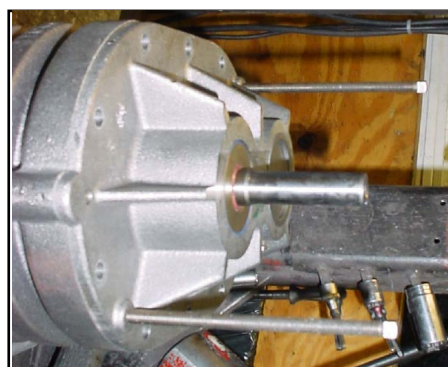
Removing drive end endplate using Jack Screws (21 series).
